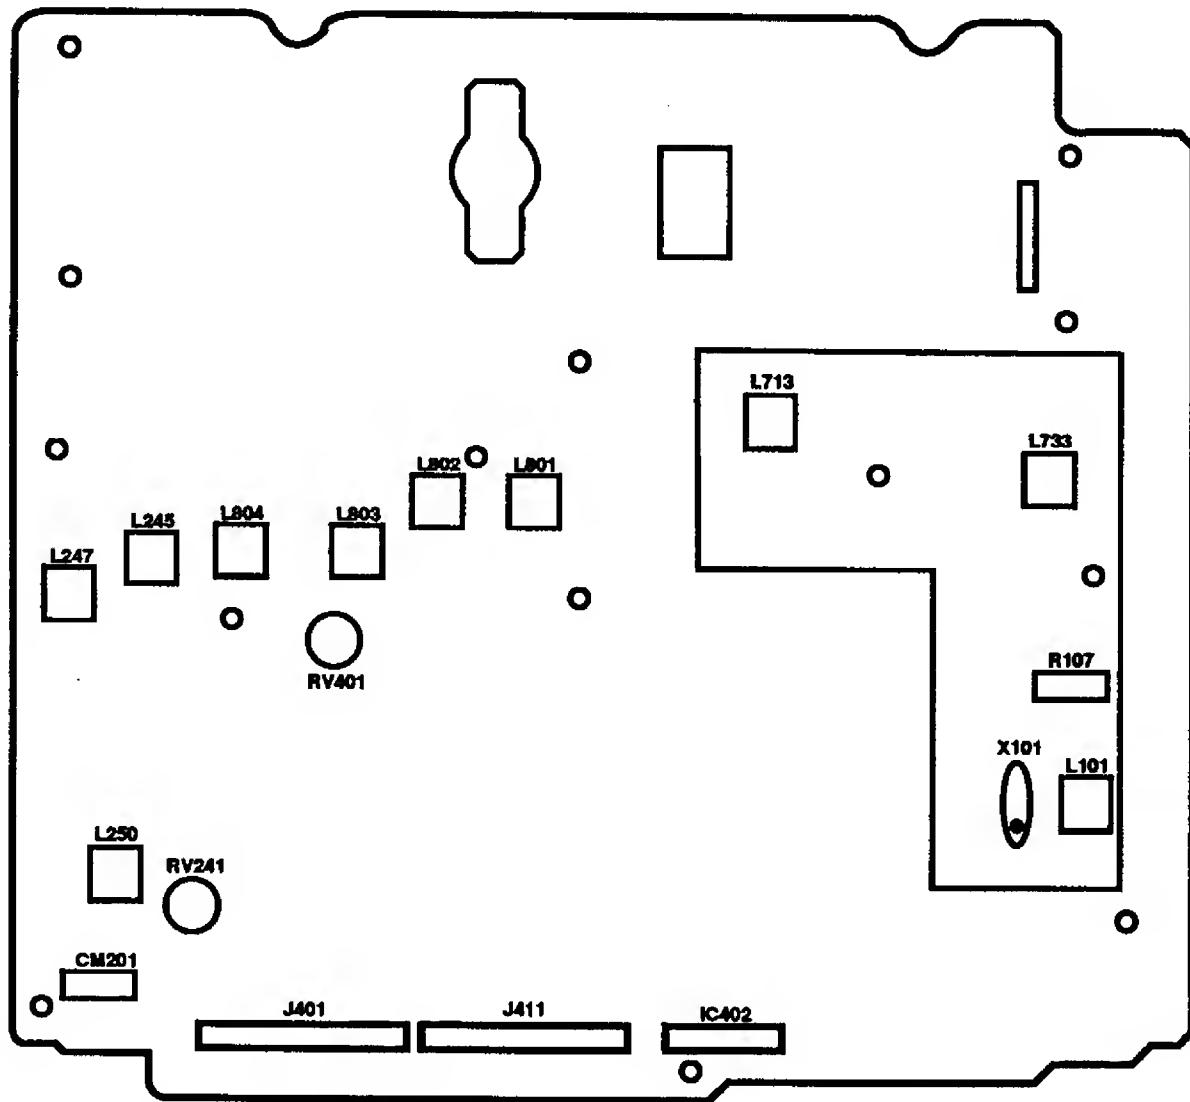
1a — SYN-TECH XTR Chassis and Control Head
